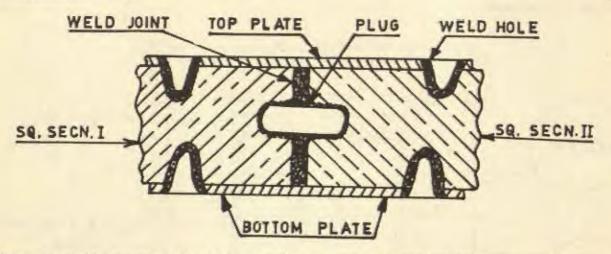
Longitudinal cross section of Dhar pillar showing the probable method of joining the iron section and the butt welding of plate (B. Prakash)
